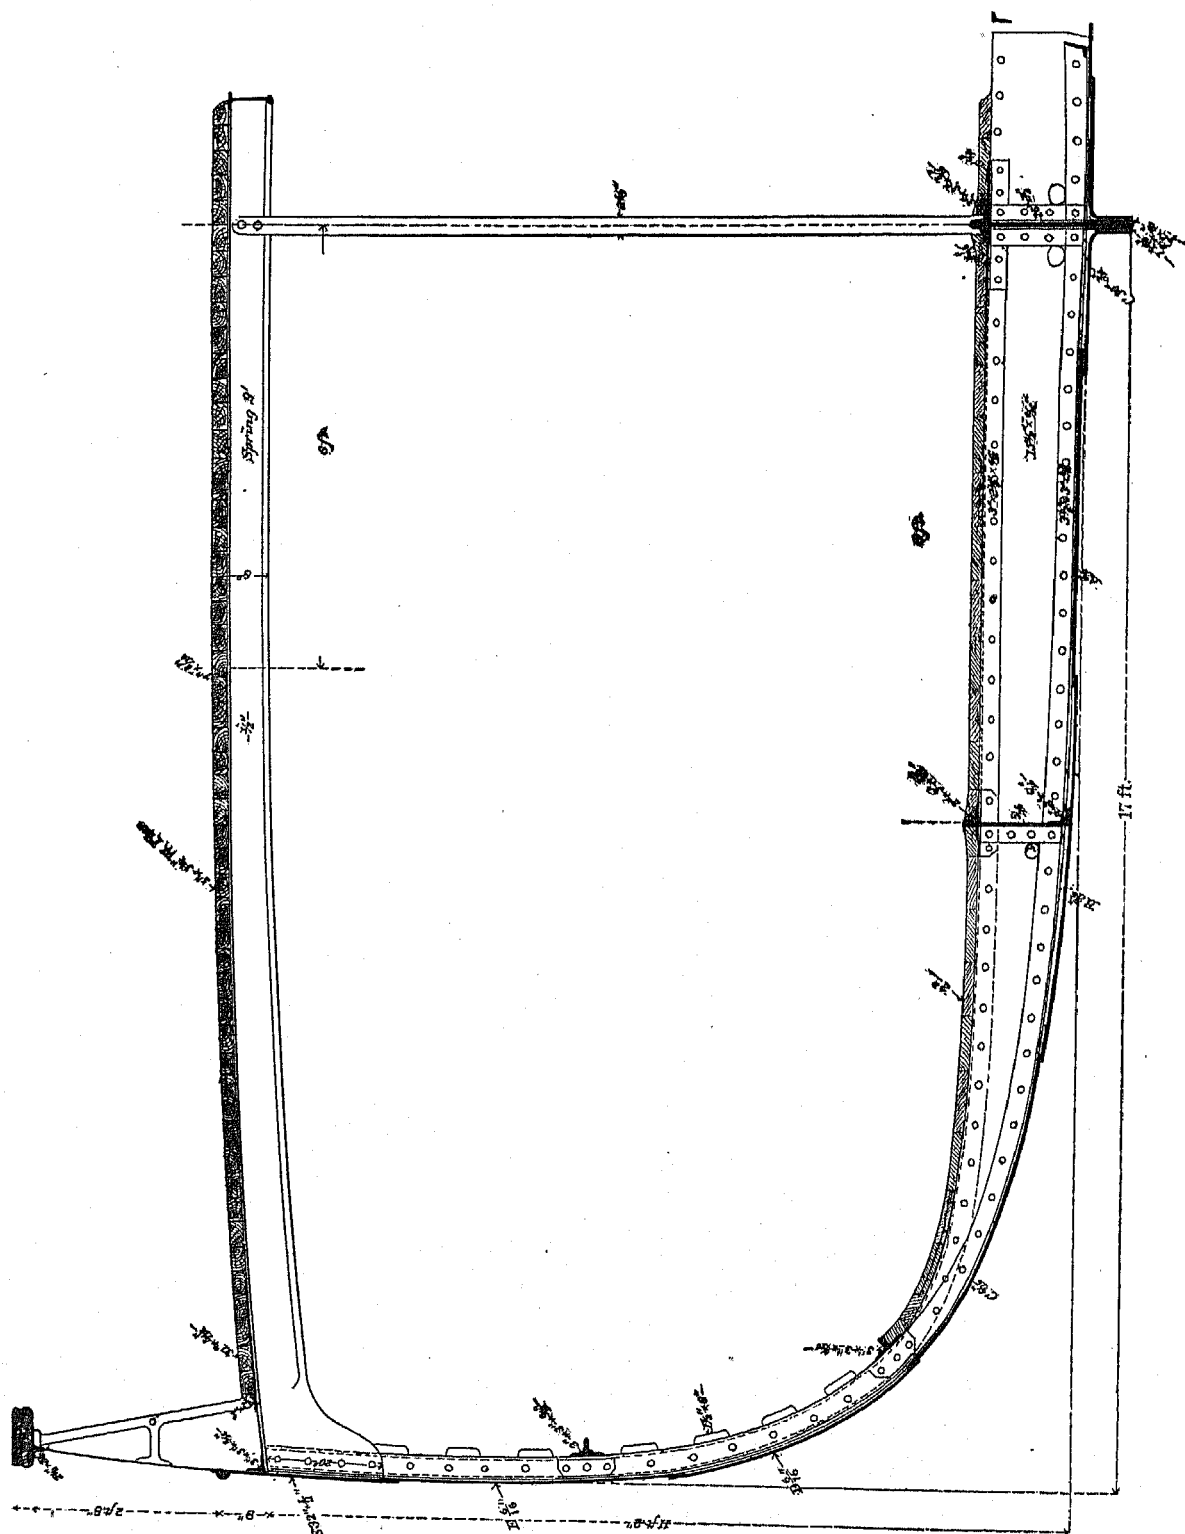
CROSS-SECTION OF IRON SCHOONER JOSEPHINE.
